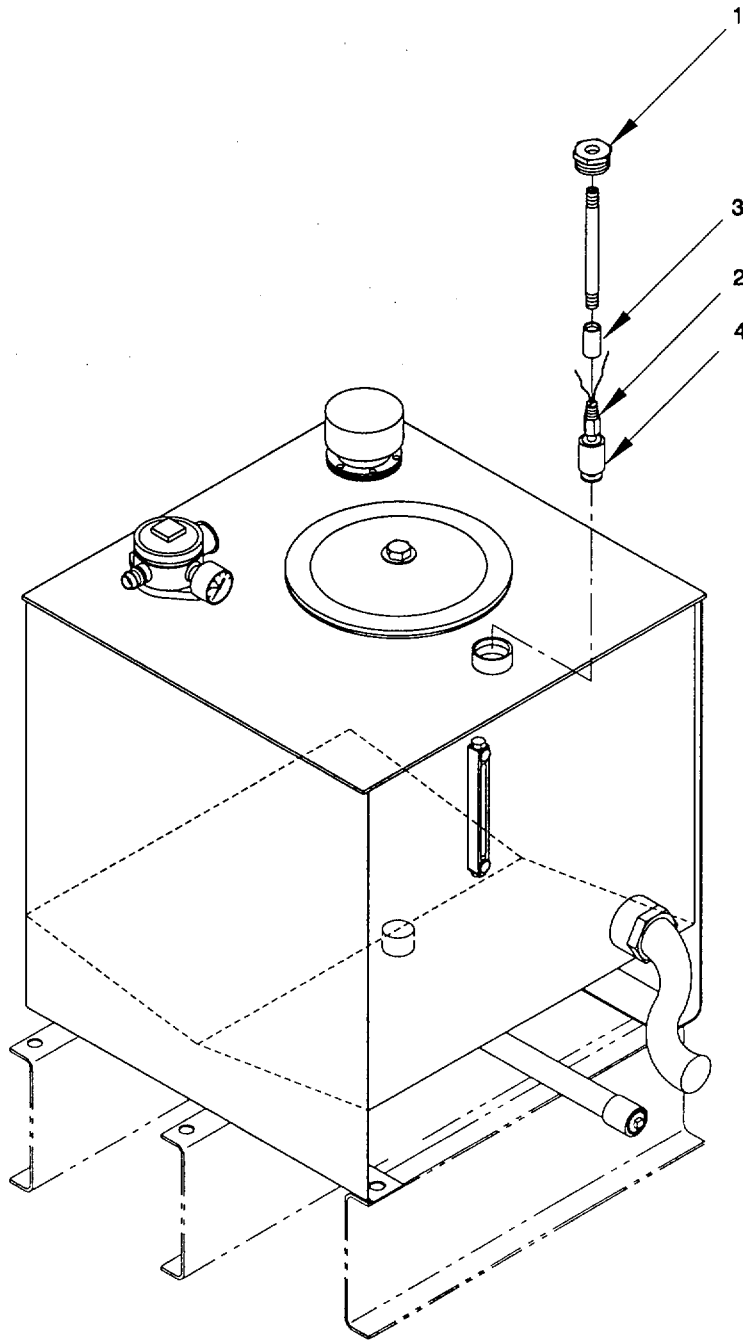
Level Sensor Subassembly, Remove/Install/Test.
